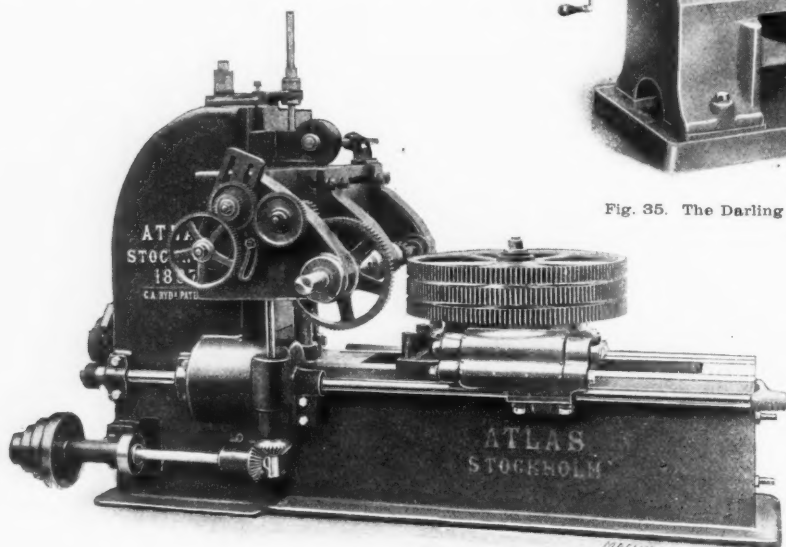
An Example of Swedish Design—The Atlas Machine, as arranged for Cutting Spur Gears.
